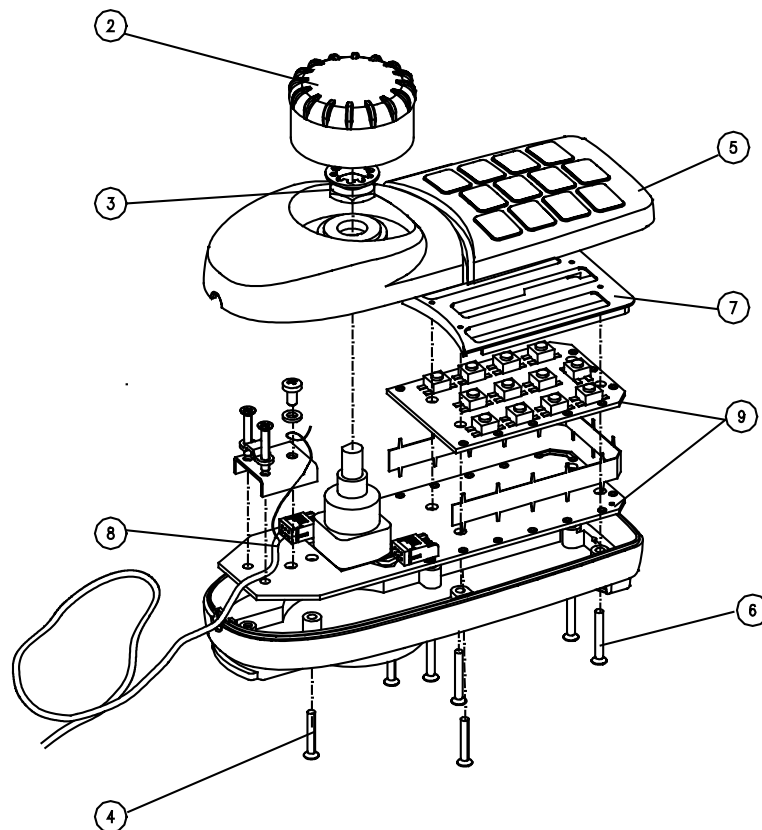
K-REMCO, K-CREMCO disassembly and reassembly
